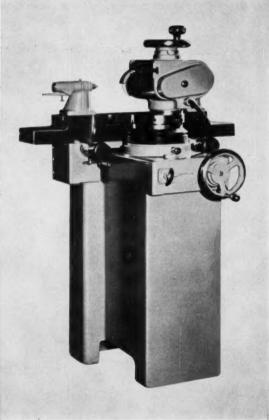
Rear operating position of cutter and tool grinder shown in Fig. 1
